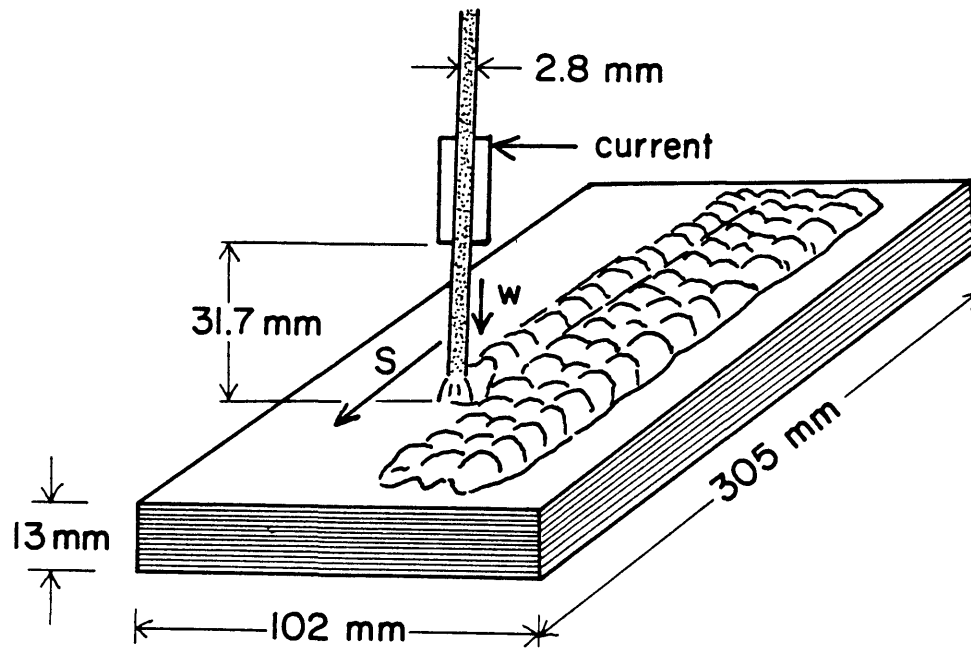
Welding procedure for samples from matrix 1. 1020 steel plate was used, and welding was done with the automatic flux-cored arc welding process.
